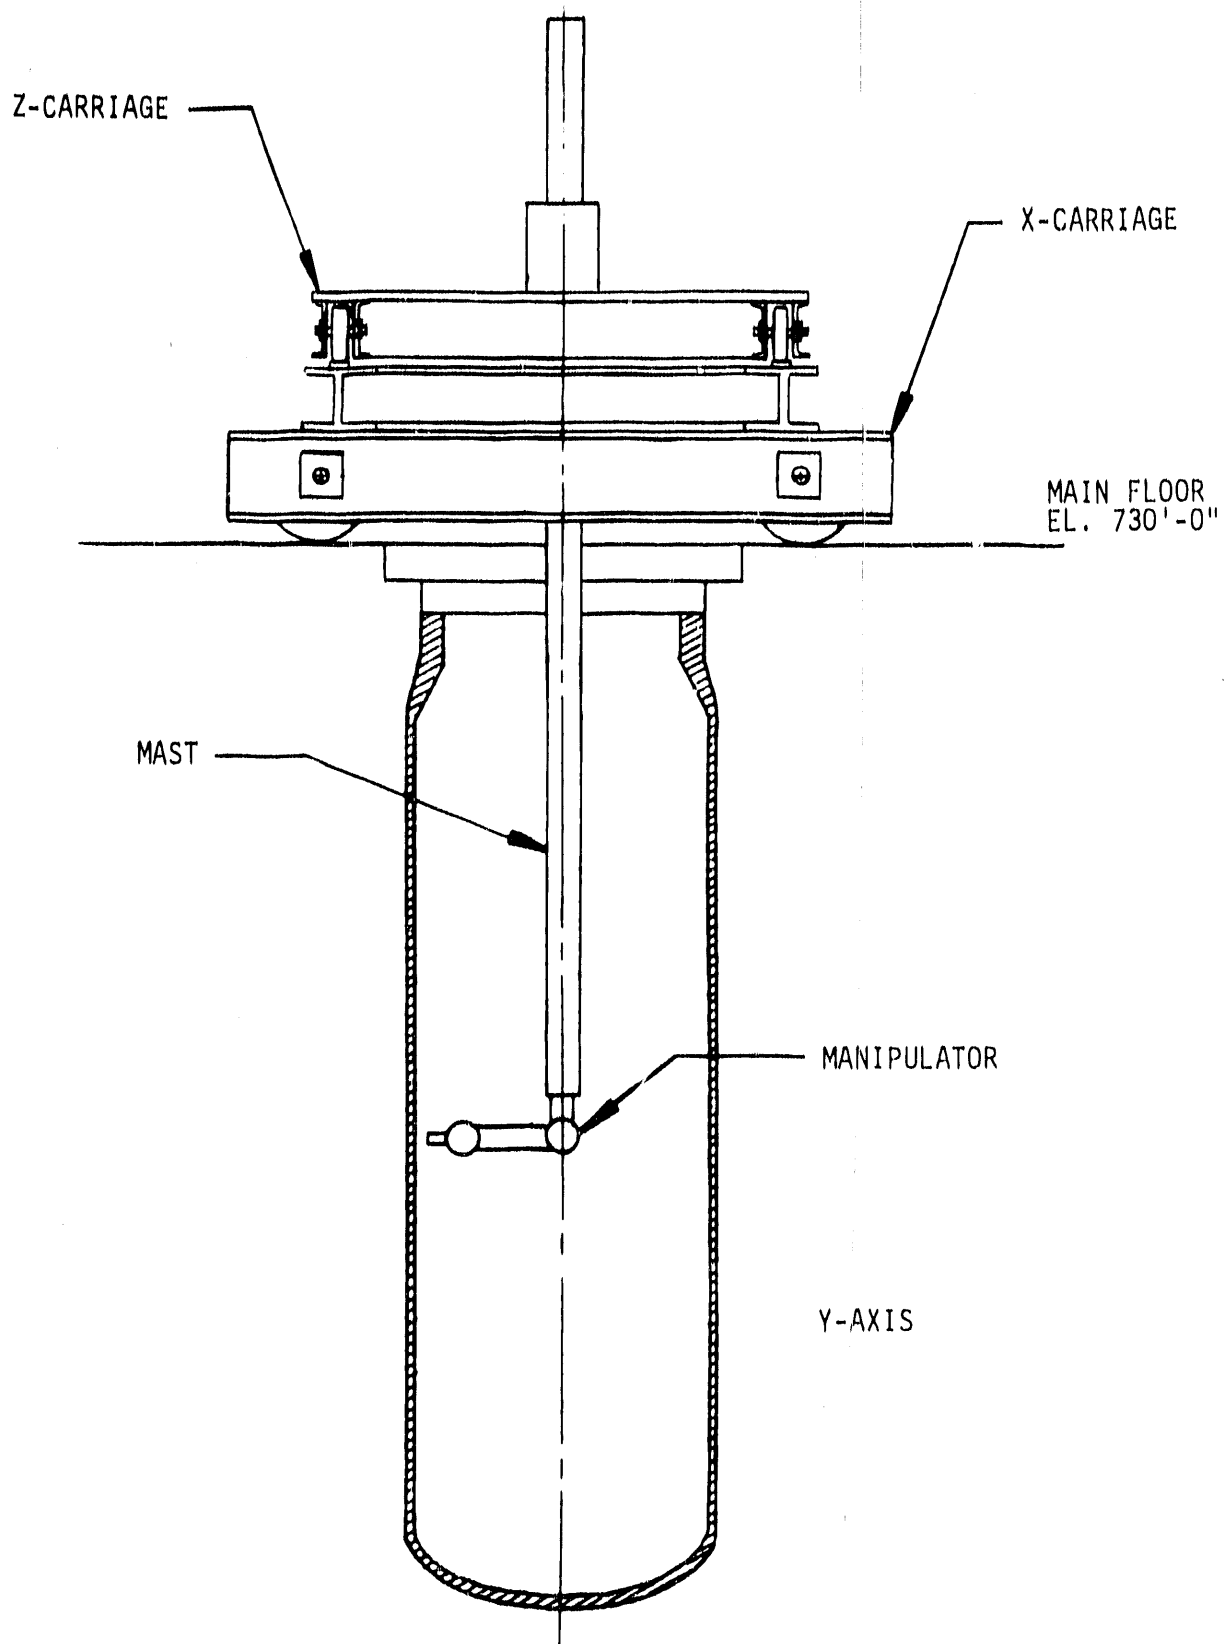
Gantry-Mounted Mast Arrangement
